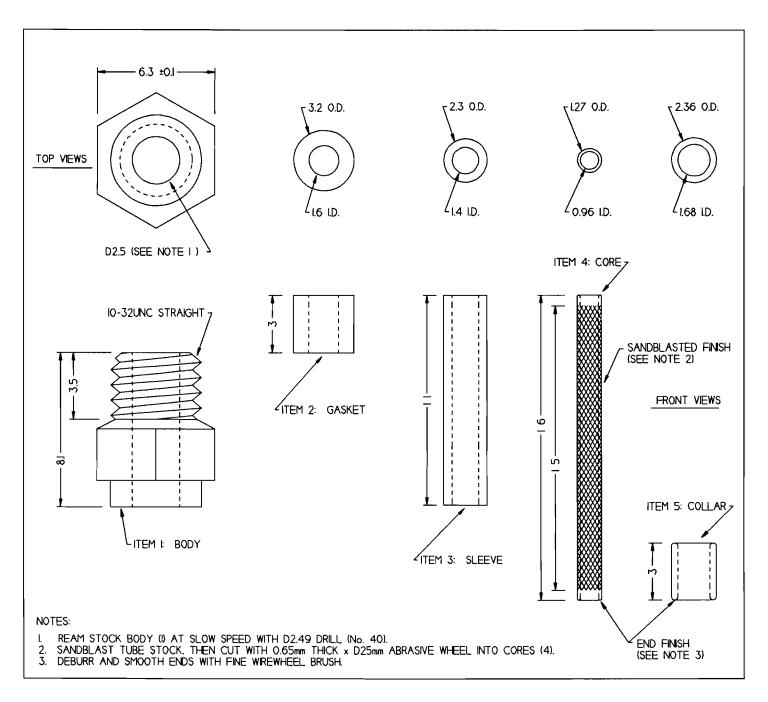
Assembly detail drawing showing driver manifold and taxel adapters designed to fit 20 AWG TEFLON® tubing. Scale 5X. Drawing DTRV3003.
